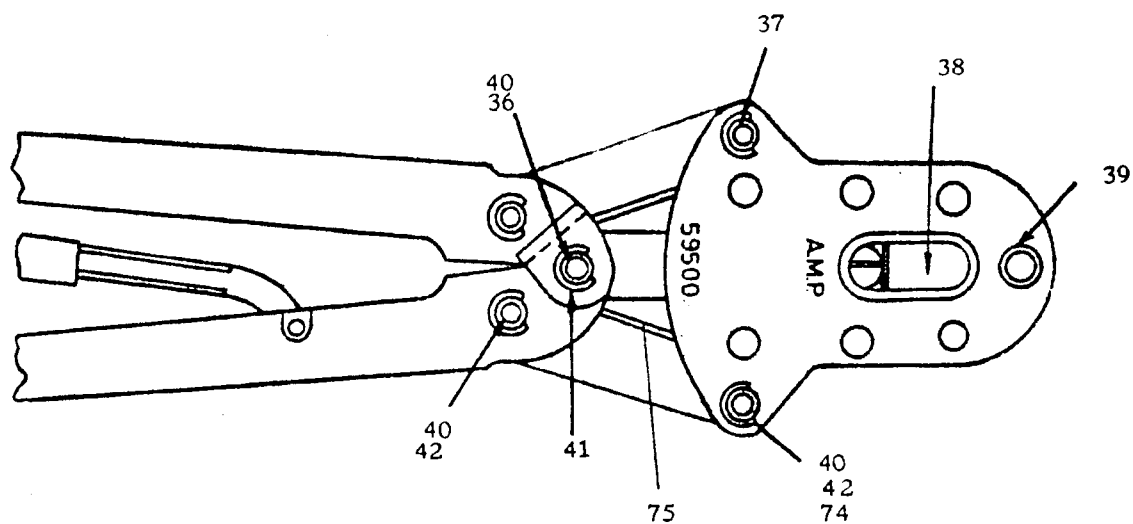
Hand Ratchet Indenter Hand Tool 39/8133
